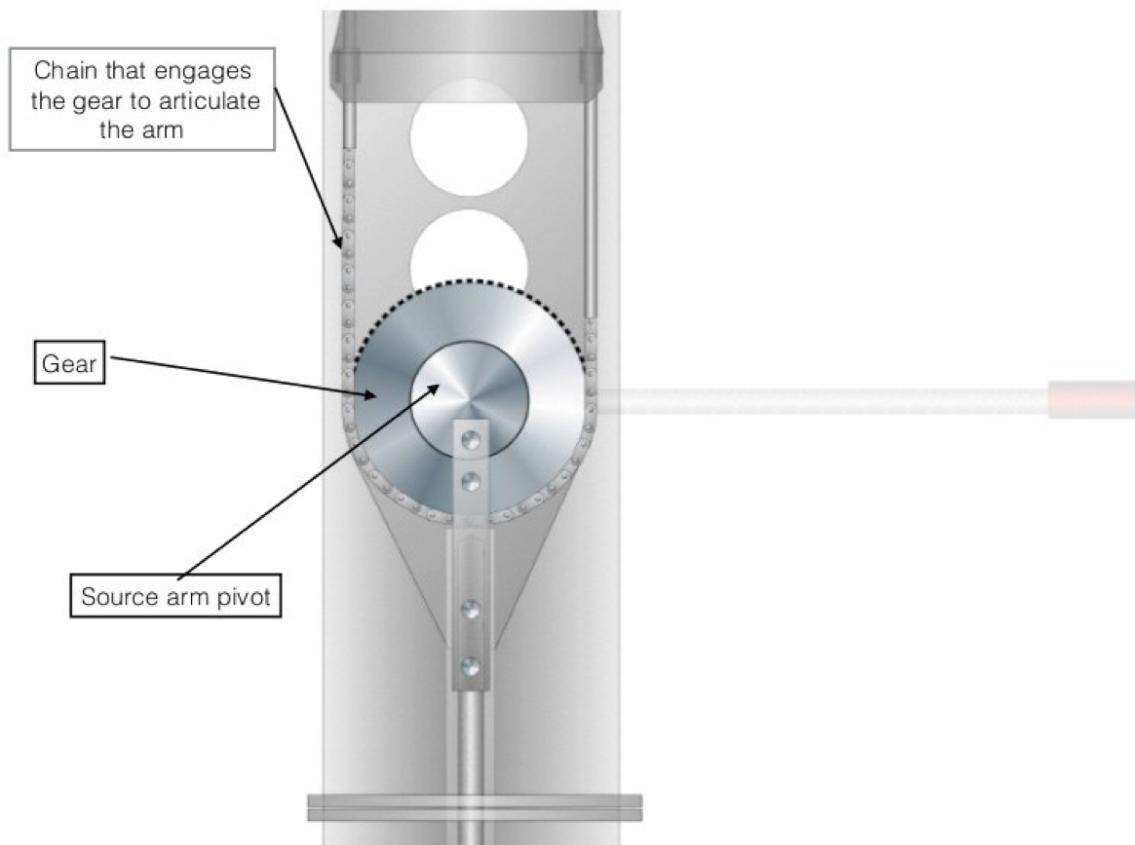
Technical drawing showing the mechanism behind the rotation of the arm.
